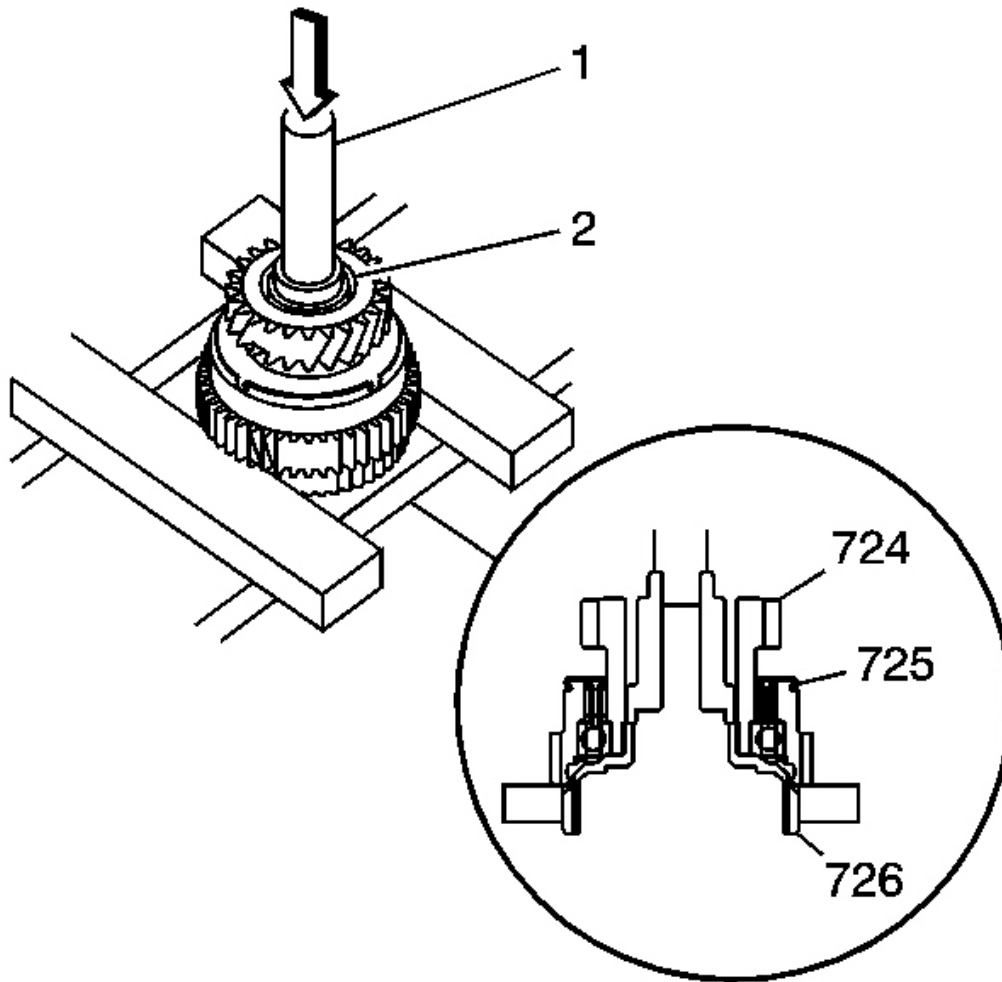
Coast Sprag Assembly, Coast Clutch Hub & 1st Drive Gear
